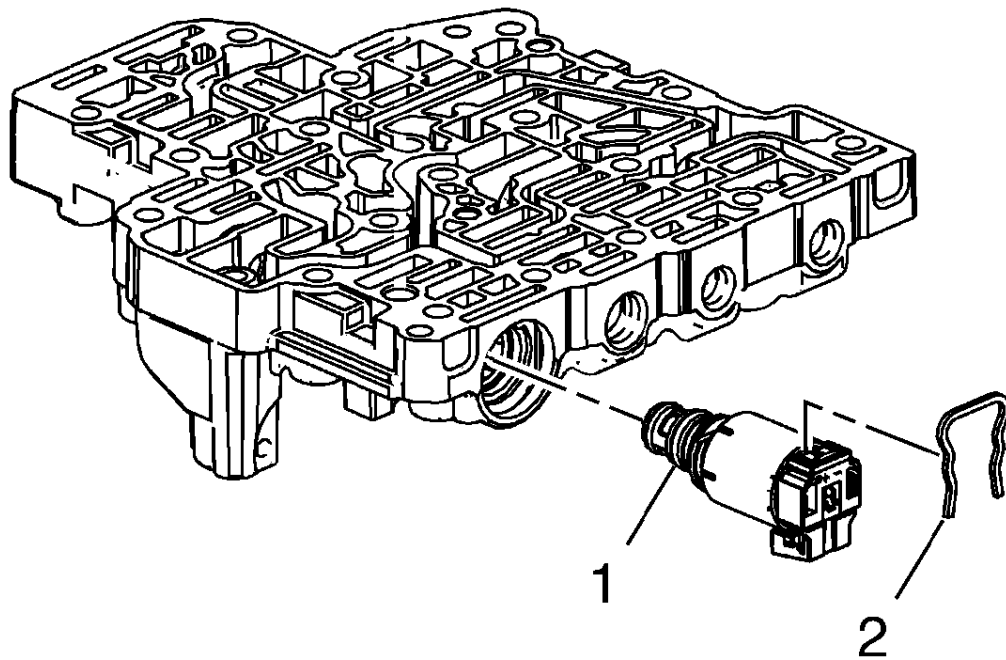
Line Pressure Control Solenoid Valve And Retainer
